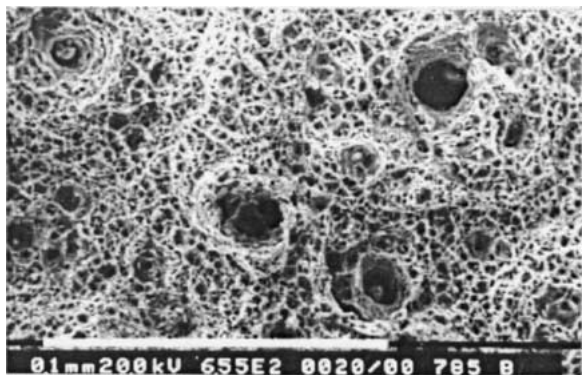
Fracture surface of specimen 785B18 showing ductile dimples and big holes with inclusions.
